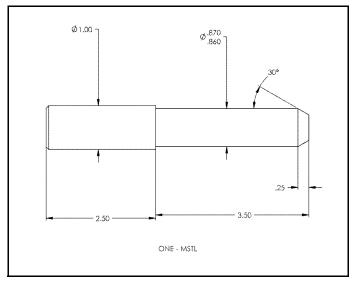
Drift Pin for Lining Up Thrust Washers with Output Planet Gear
